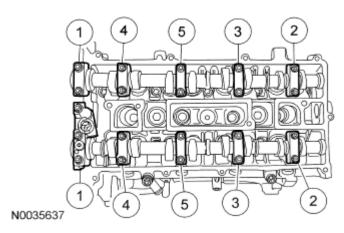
Locating Camshaft Lobes Courtesy of FORD MOTOR CO.
